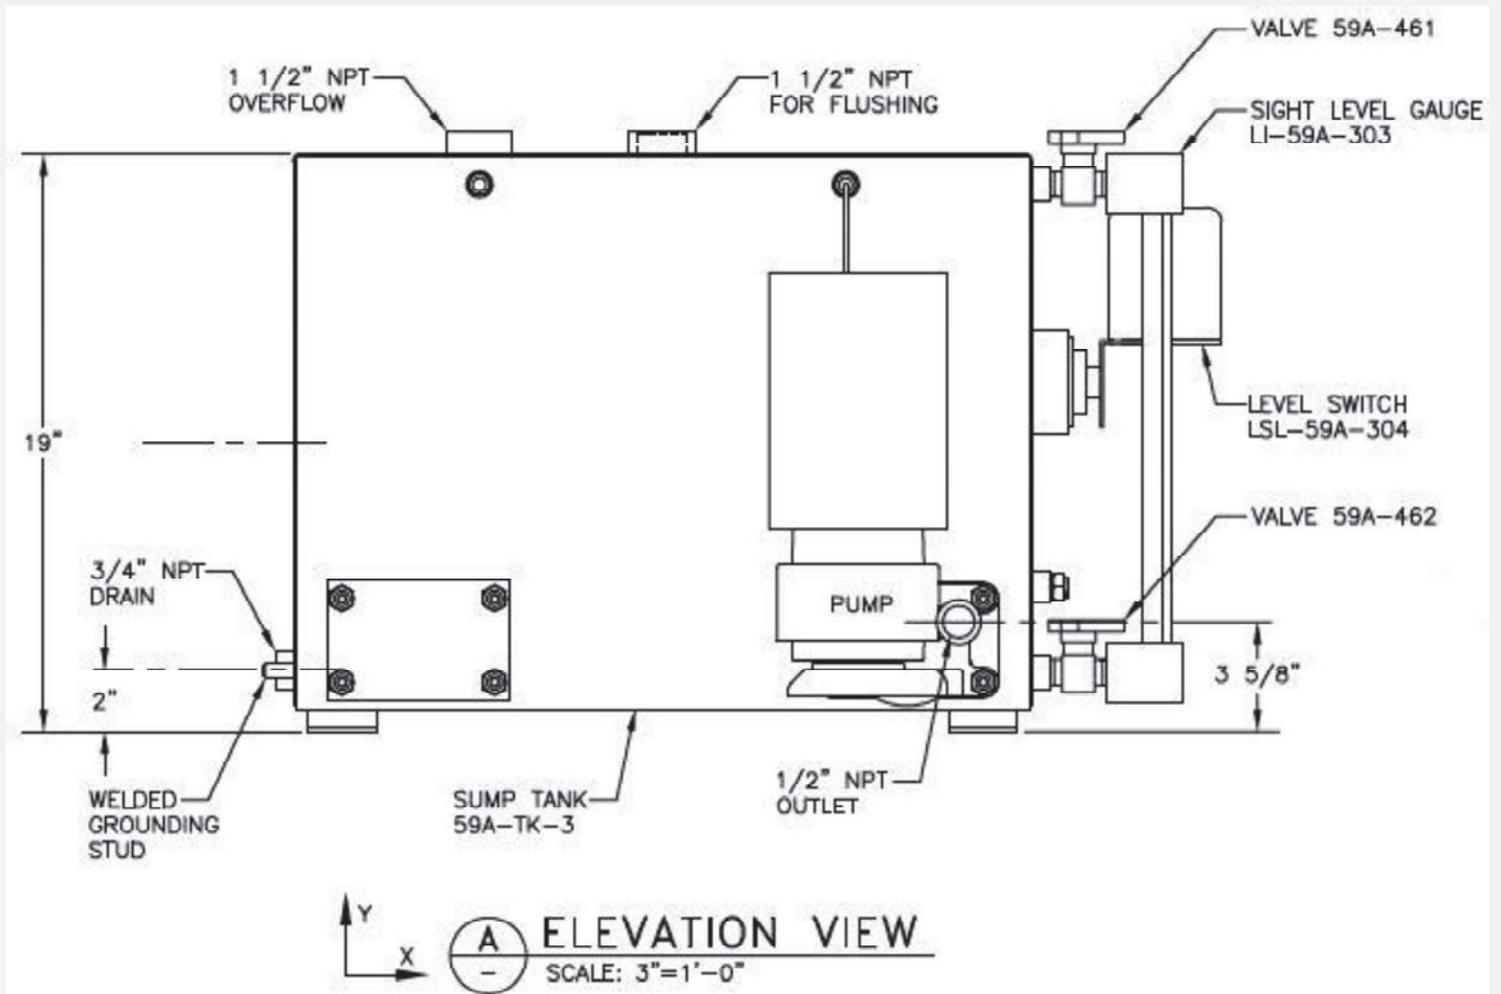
Elevation View "A" of New Sump Tank 59A-TK-3 (Drawing H-9-6113, Sheet 1)
